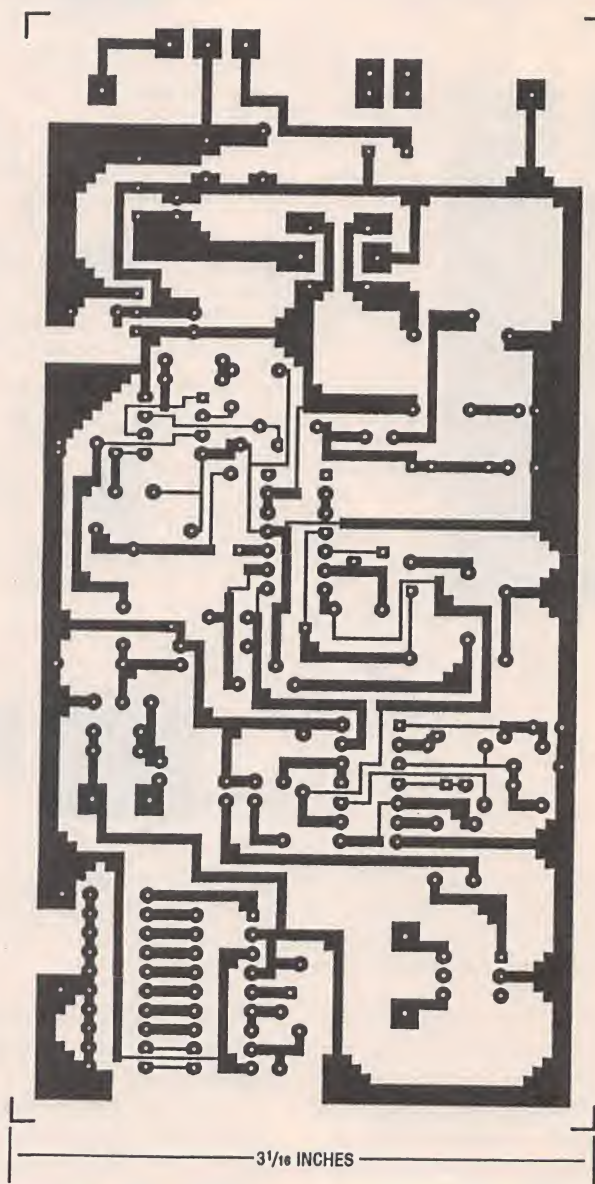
The Explosive Gas Detector was assembled on a printed-circuit board measuring about $3\frac{1}{16}$ by $5\frac{1}{16}$ inches. A template for that printed-circuit pattern is shown here.
